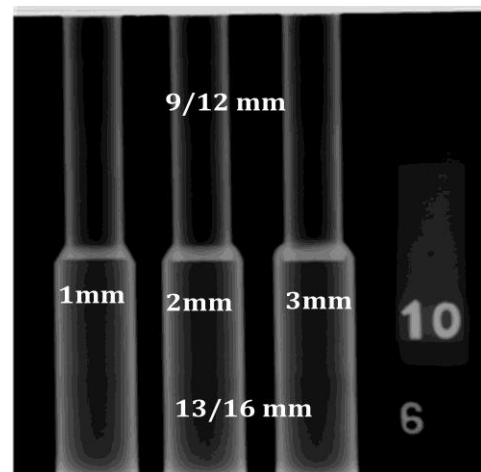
RT Images of 9/12mm # 13/16 mm welded samples
